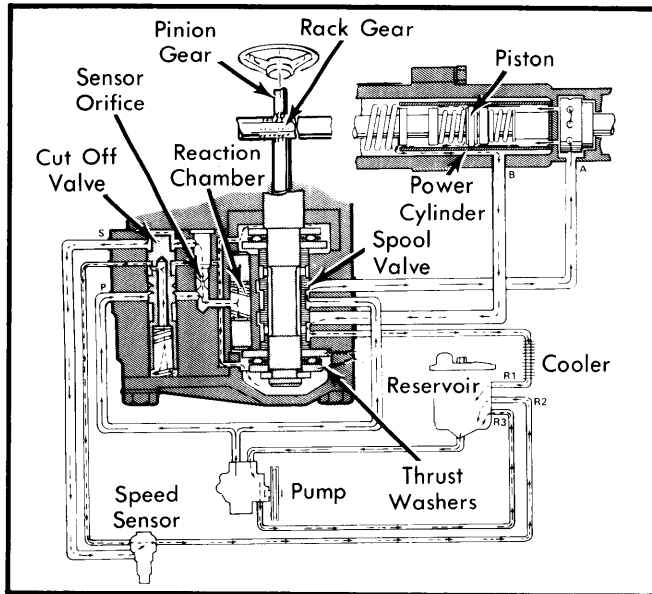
Sectional View of Power Steering Pump and Power Steering Gear
